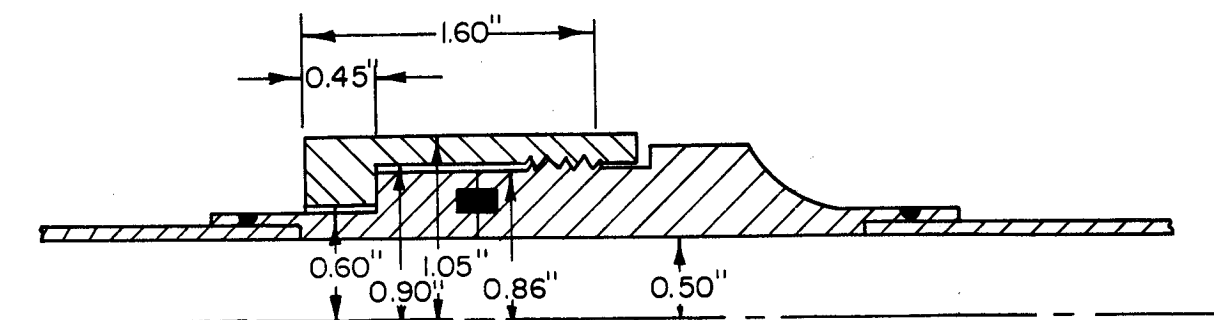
THREADED-CONNECTOR GEOMETRY
